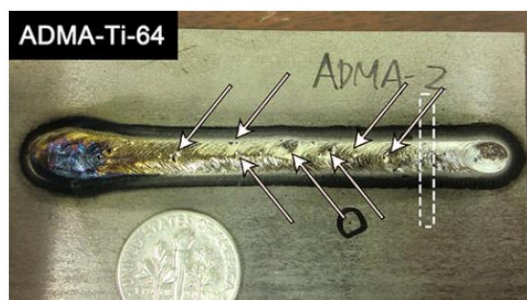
GTA weld of ADMA Ti-6Al-4V plate. Plate and weld porosity shown. Dotted white rectangle shows position cross-section. [111]
